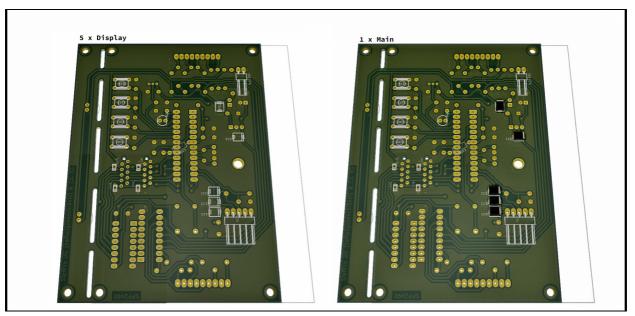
Basic SMD assembly of SPK2241.02 step 1
